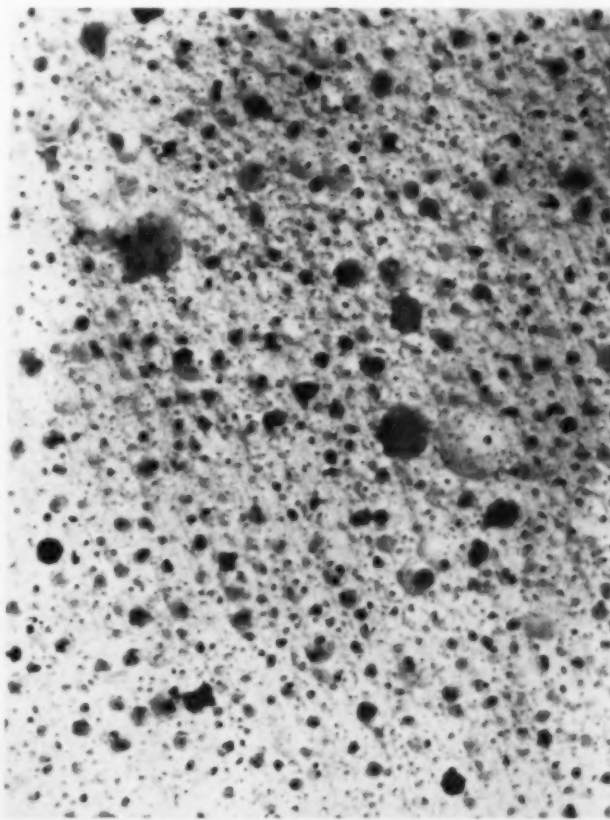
Macroscopic view at 20X of the permeable mold structure shown in Fig. 7.
